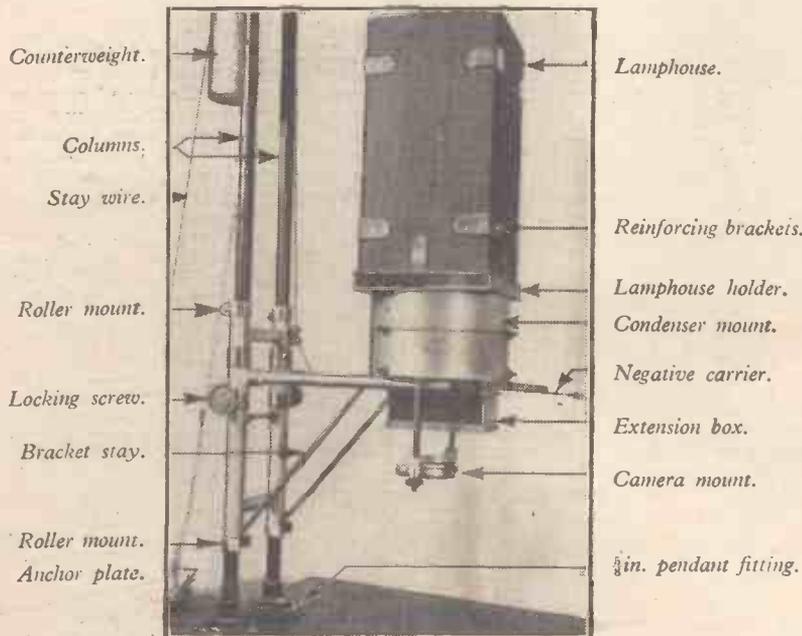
Side view of the enlarger, indicating the various component parts.
